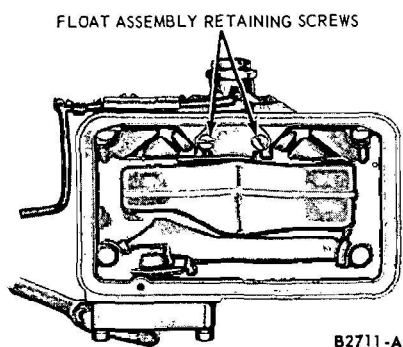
Float Assembly Removal or Installation—Holley 4-V
